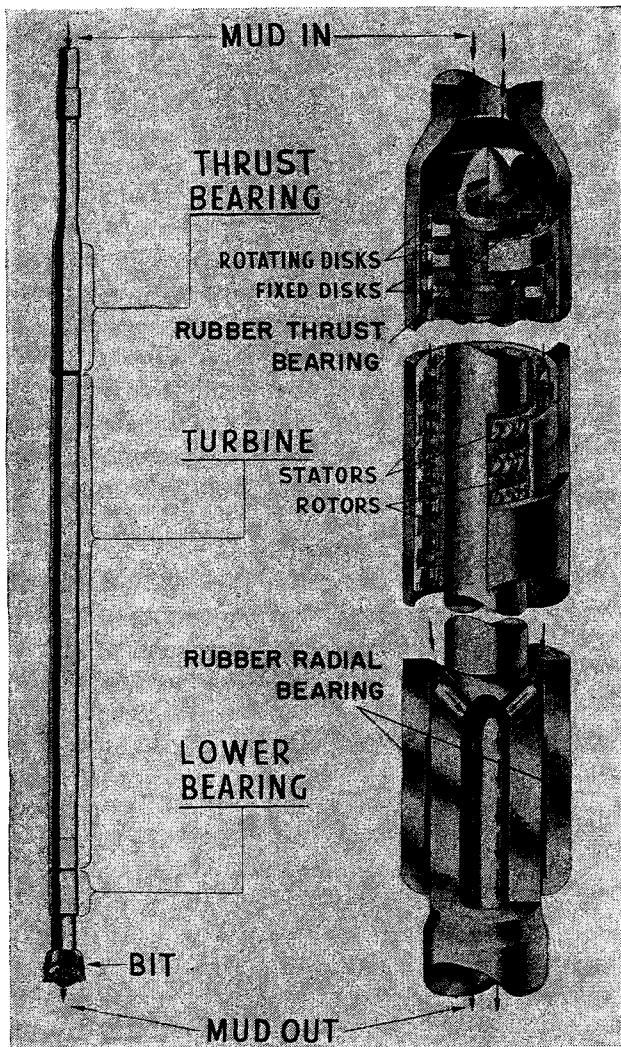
Cross section of turbodrill. (9-2, Courtesy World Oil.)
